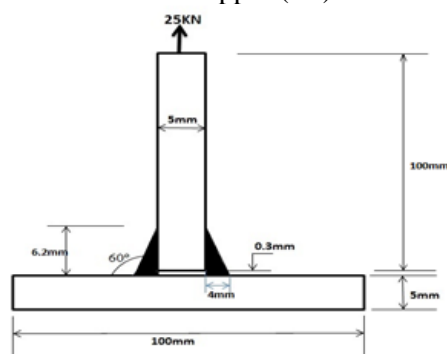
Arc weld of T-joint under tensile load for 0.3mm gap and 60° angle
